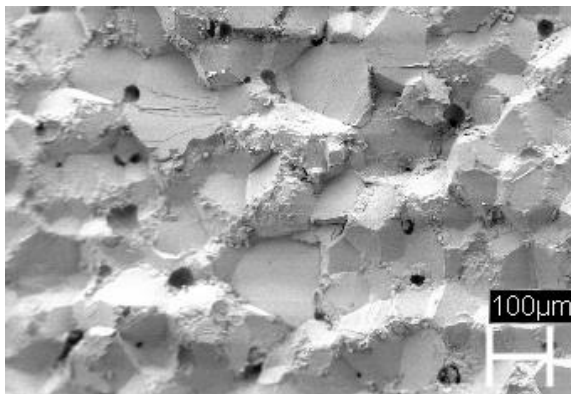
Fracture surface of a Sample1 after being heat treated showing areas of porosity as well as brittle fracture mode.
